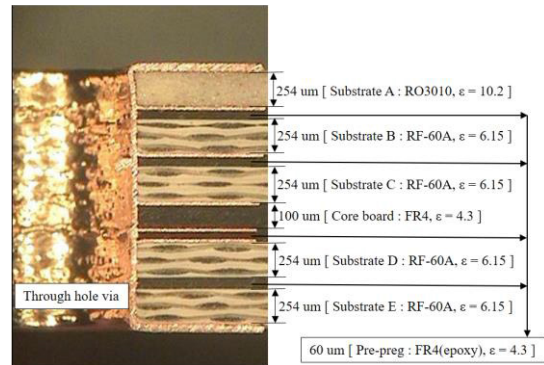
Cross-sectional view of multilayer PCB and layer characteristics.
